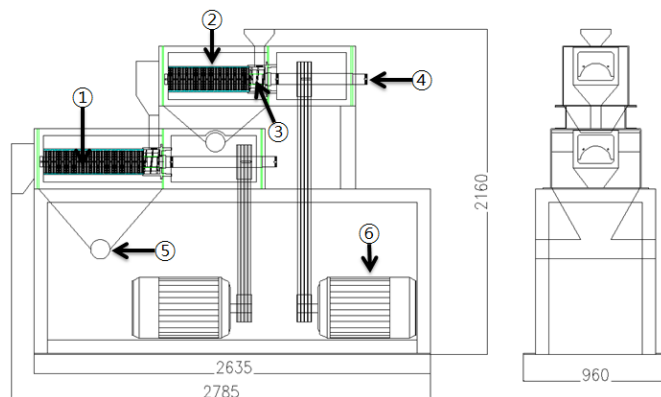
Schematic diagram of a cutting-type rice milling machine. ① Cutting roller, ② Metallic mesh, ③ Conveyer screw, ④ Main shaft air inlet, ⑤ Air suction inlet, ⑥ Motor.
